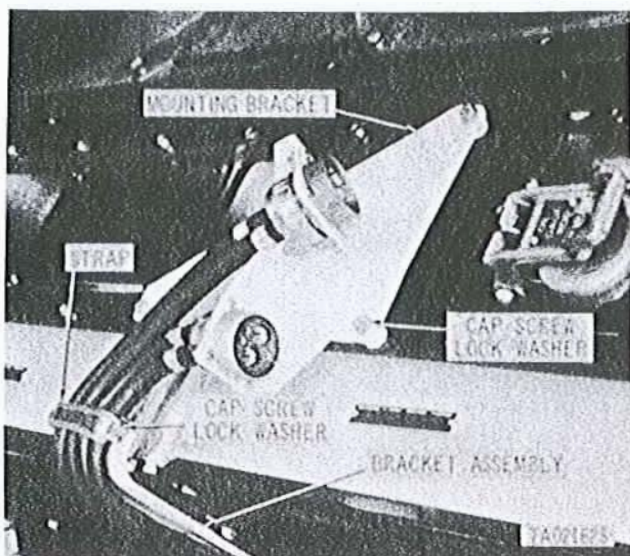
Removing or installing starter cable mounting bracket, early engines.
